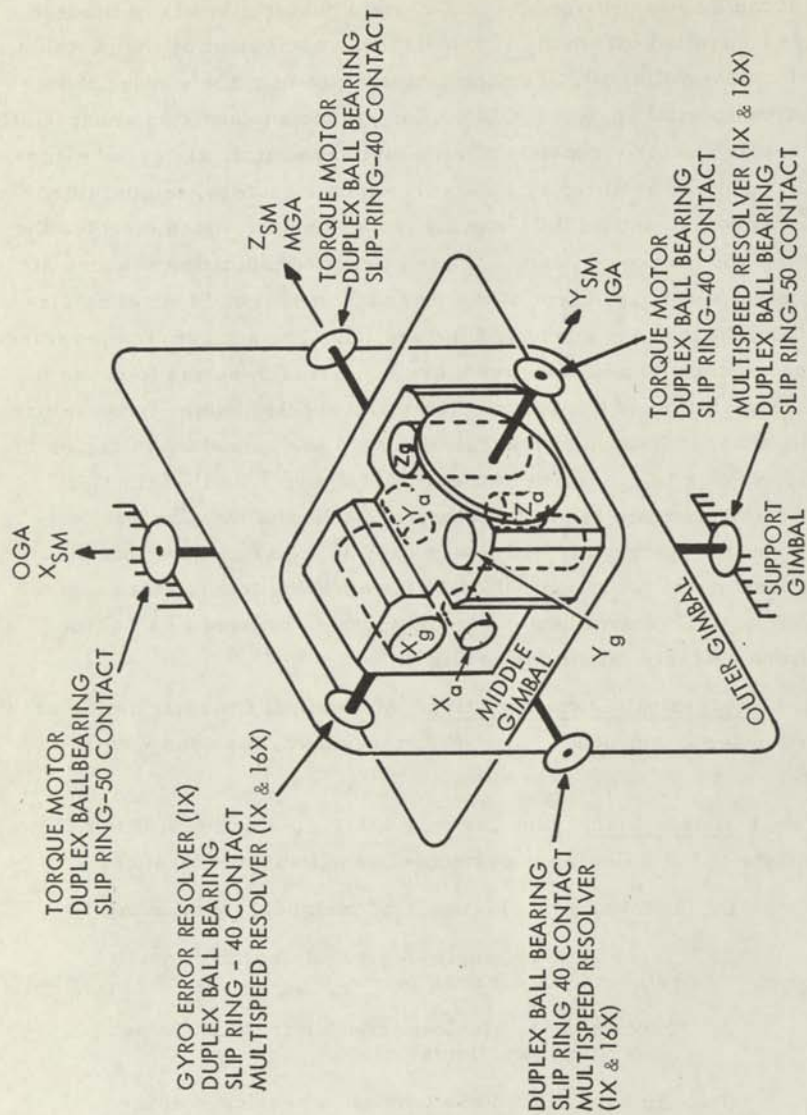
IMU Gimbal Assembly and Components
